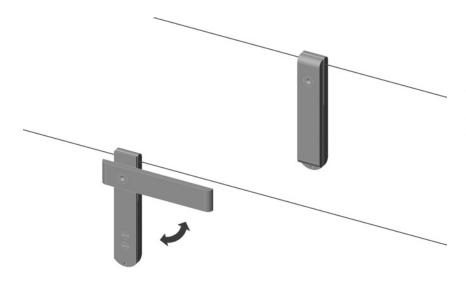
Brass capo. (© Ellen Fullman. CAD drawing © Rob Dennis, REM Design.)
